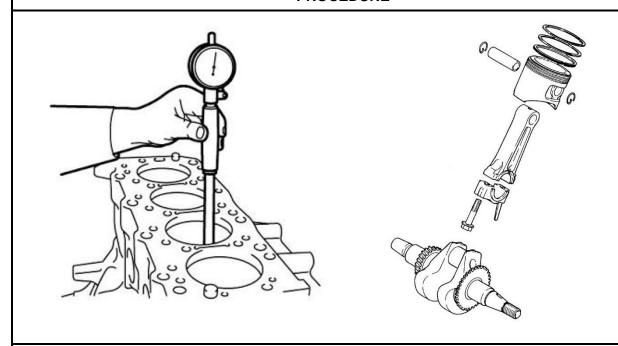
ENGINE BLOCK, CRANKSHAFT AND CONROD ASSEMBLY
